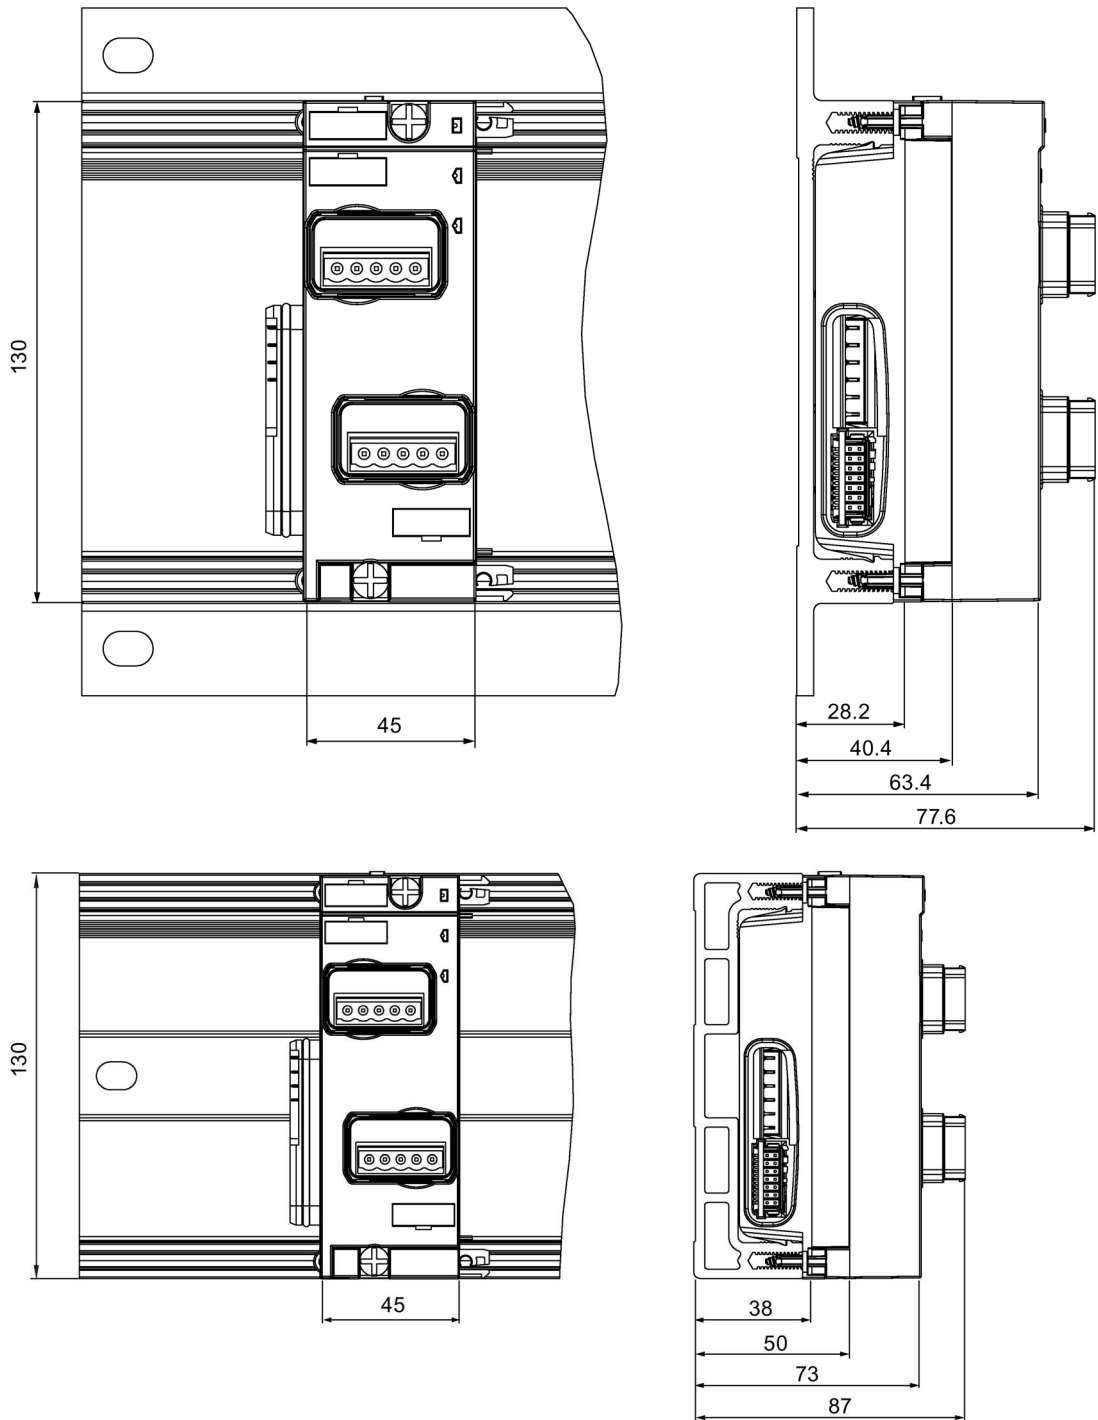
Dimension drawing of the outgoing module with CM PM-O PP connection module
